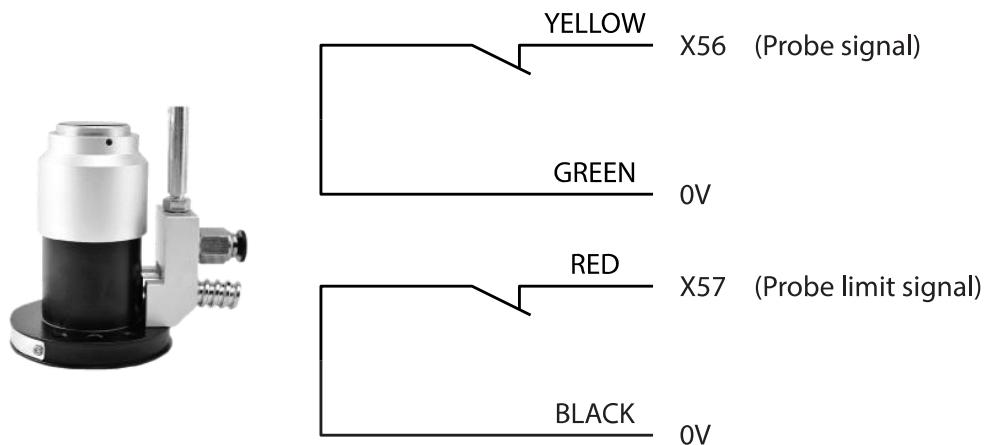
Tool length sensor wiring diagram (4 wires-NPN)
